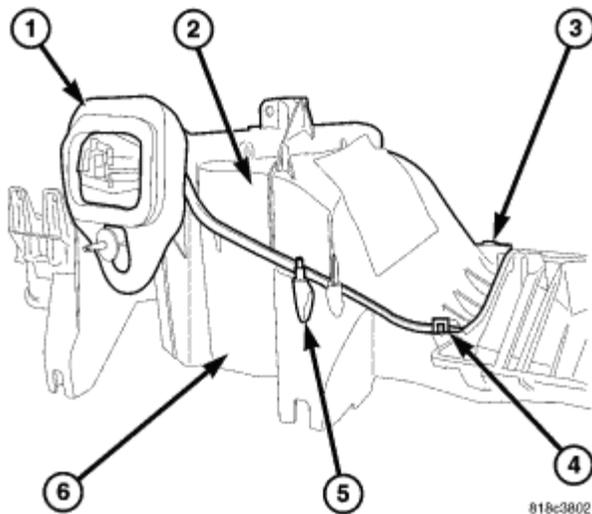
Foam Seal, HVAC Housing, Screws, Plastic Retaining Tabs & Metal Clips
